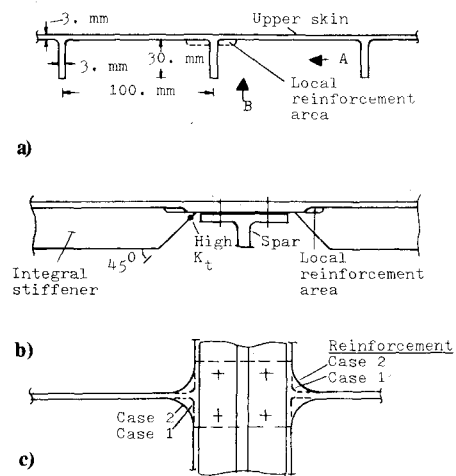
Details of aircraft integral stiffened skin. a) Typical section. b) View A. c) View B.
